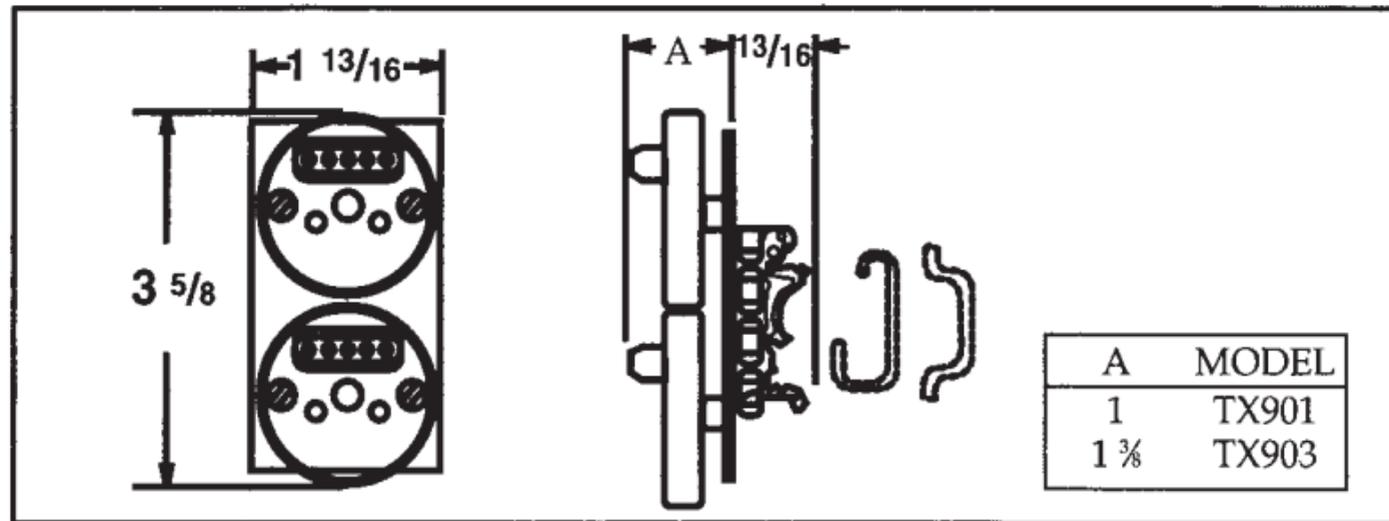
TX90-DIN DIN Rail Mounting Adapter (Dimensions in Inches)
